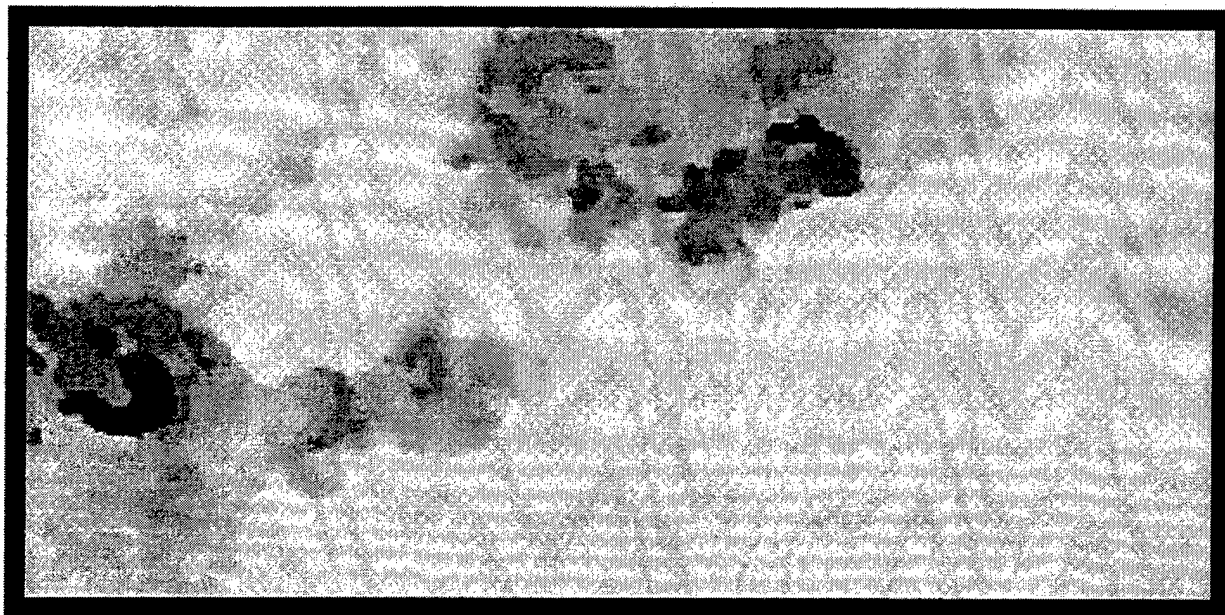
Ultrasonic C-scan image of corroded aluminum sheet
